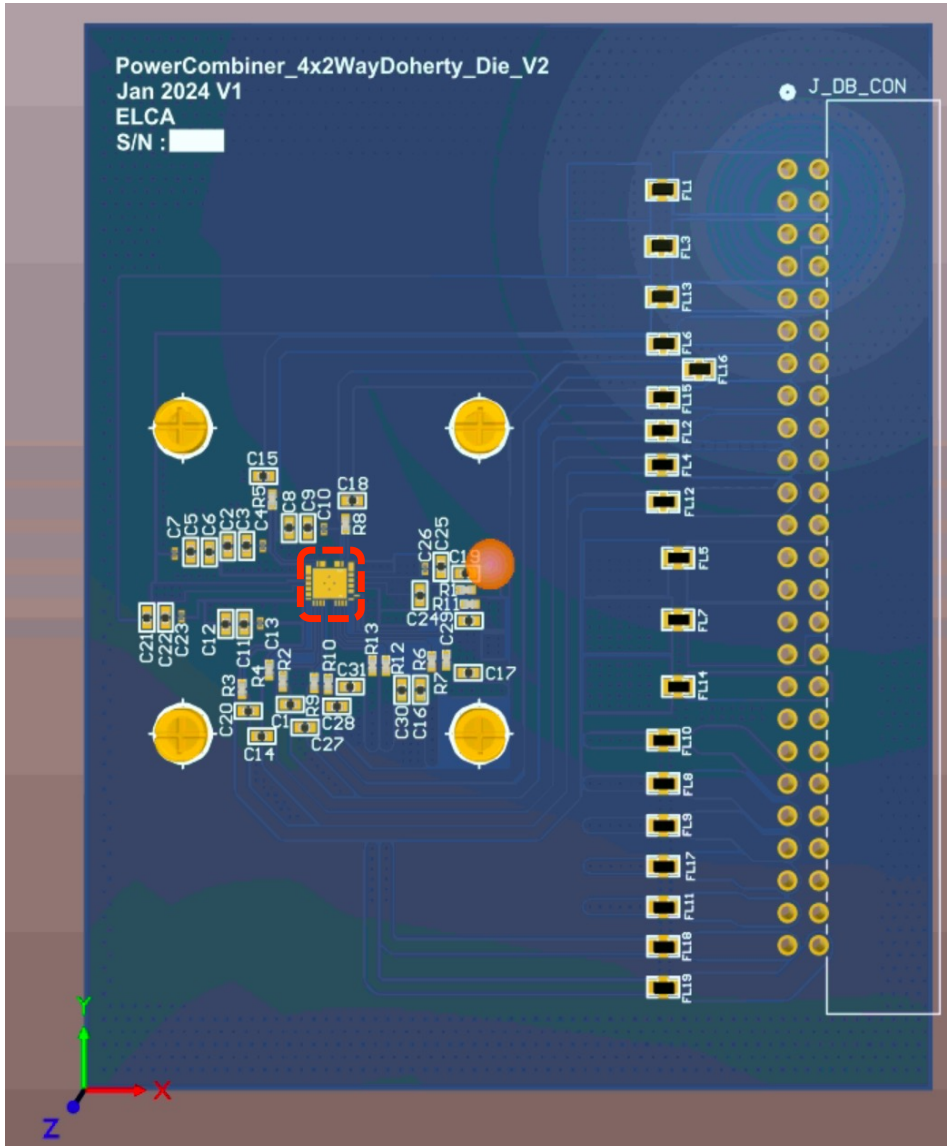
Daughter board PCB for the 4 × 2-way Doherty PA.
